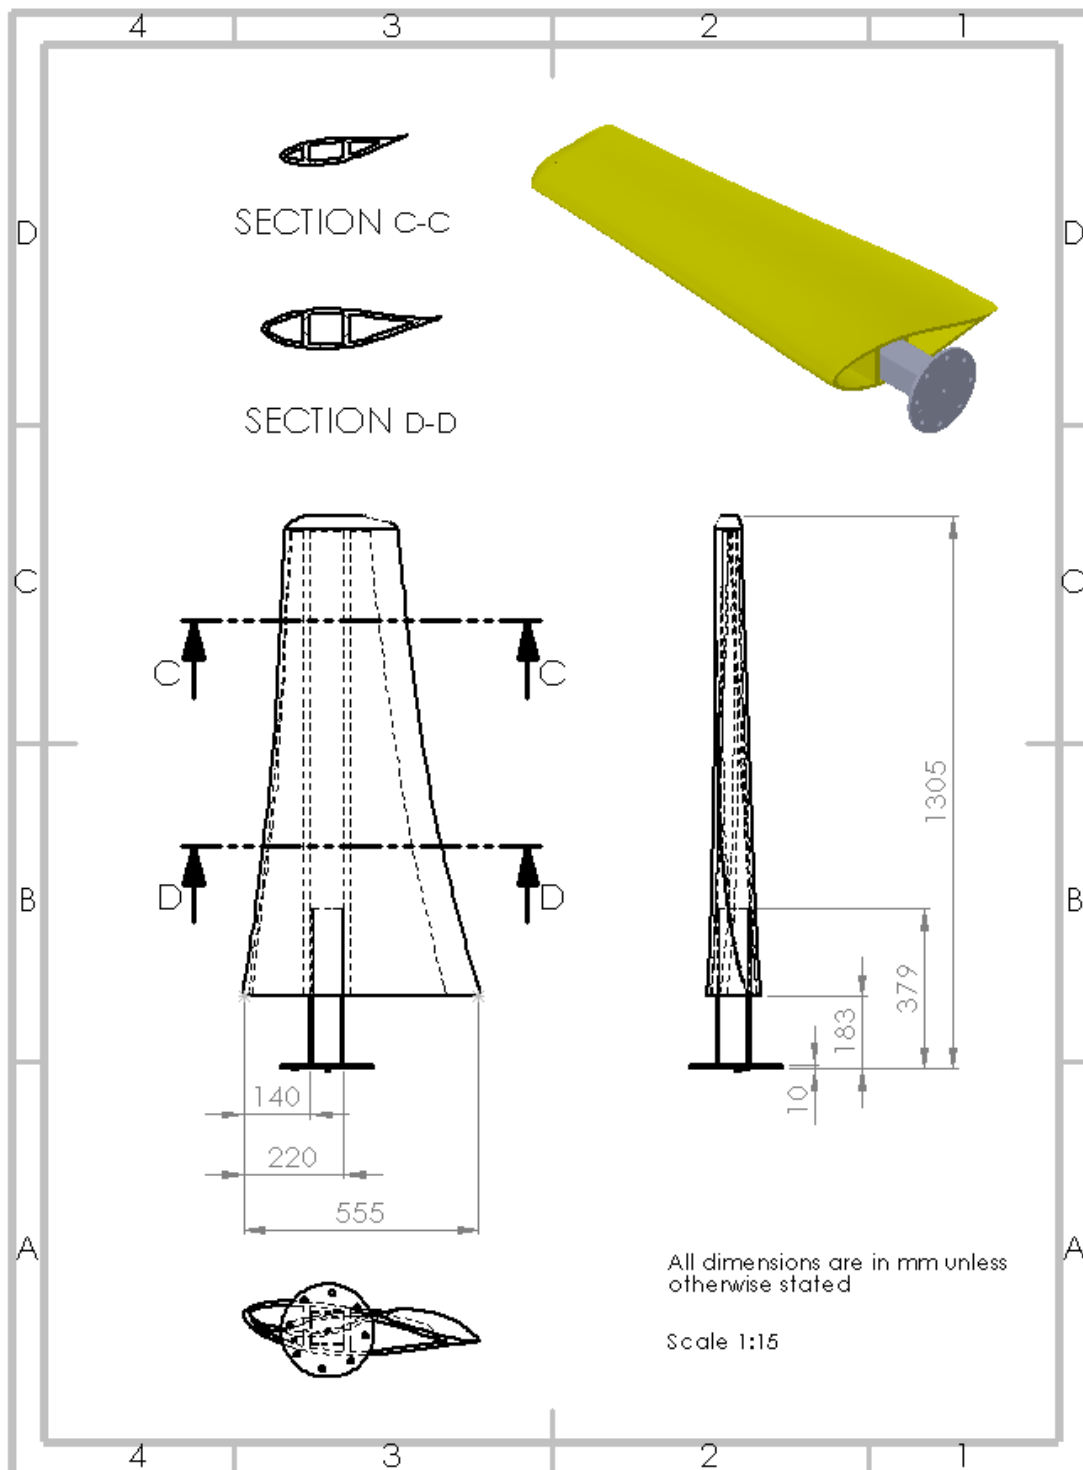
Drawing of the 3.0m RRES rotor blade and spar assembly.
